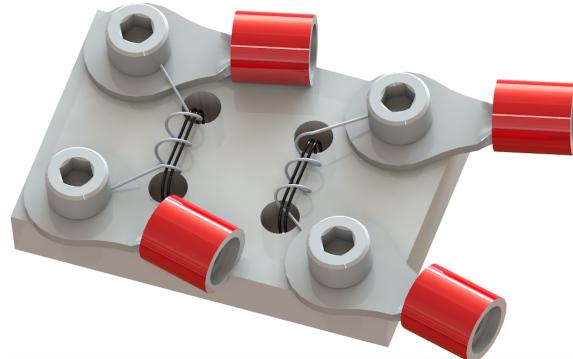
Close-up of wires box under PSS, showing nichrome-wrapped thread
